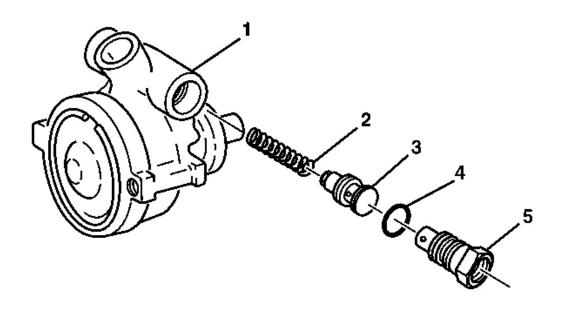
Exploded View Of Power Steering Pump Flow Control Valve (CB Series) Courtesy of GENERAL MOTORS CORP.
